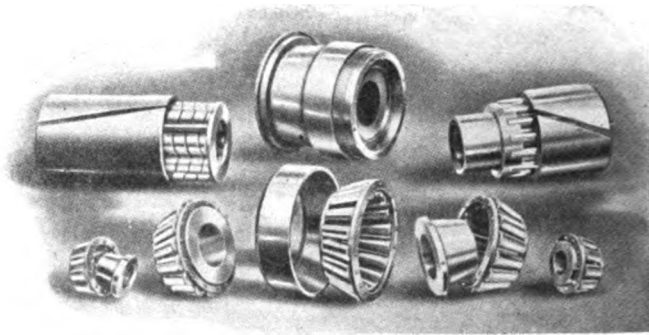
Plain, Flexible, and Conical Roller Bearings.
